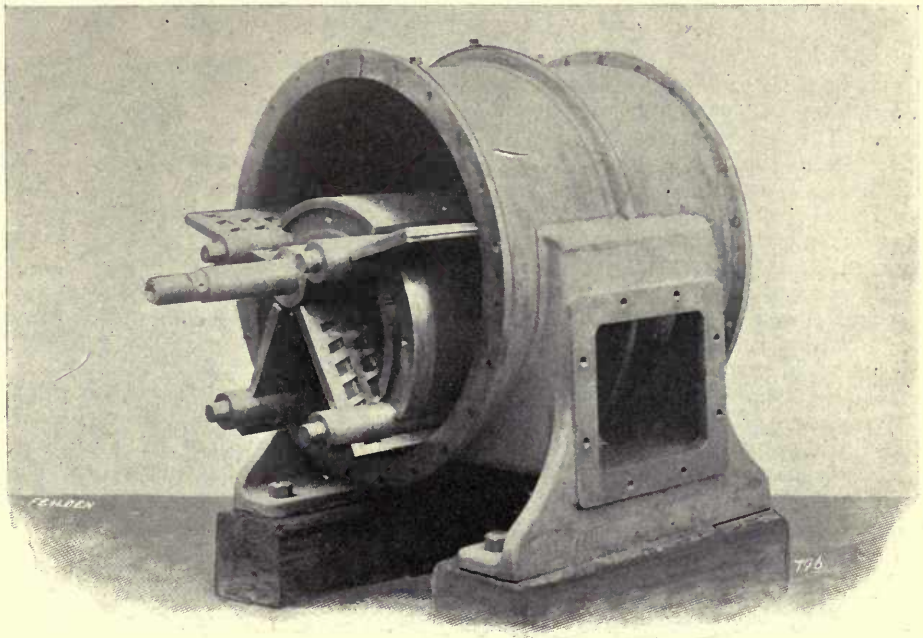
WALLER'S PATENT FOUR-BLADE EXHAUSTER, WITH BACK COVER REMOVED AND THE BLADES, ROLLS, AND CENTRE SPINDLE DRAWN SLIGHTLY OUT TO SHOW INTERNAL ARRANGEMENT.
